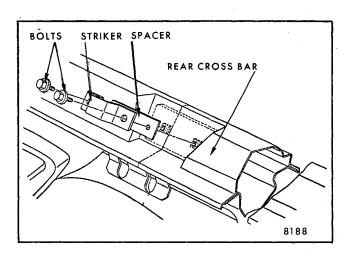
Back Door Striker Installation - H-15 Styles
